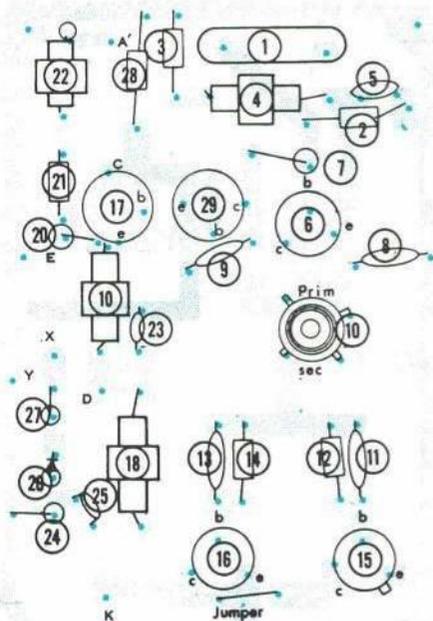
RF-section component location, top view. Assemble in order of numbers on each part. Shown full size. Heat sink on transistors #16 and #17.
